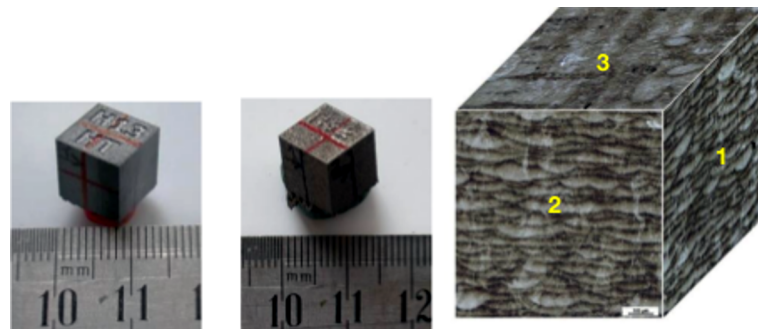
Form of the specimen and cut planes; 1,2-perpendicular to build direction; 3-parallel with building direction
